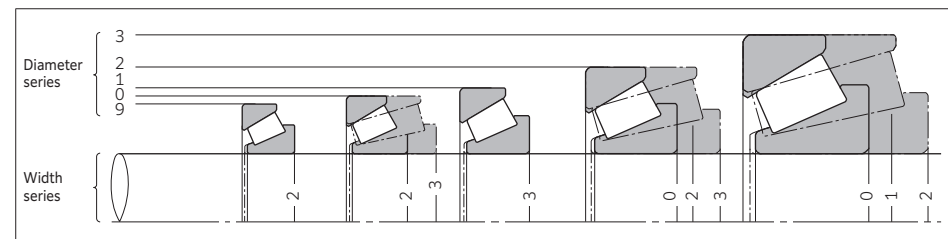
Dimension series for tapered roller bearings (based on JIS B 1534)
